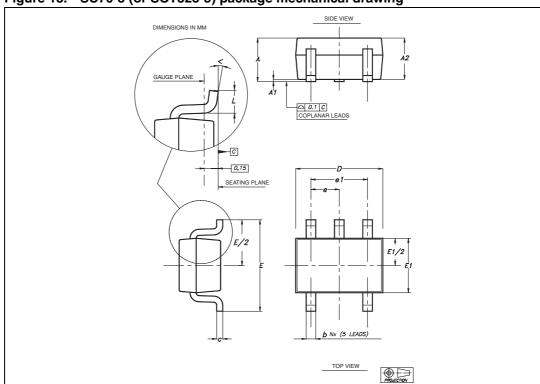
SC70-5 (or SOT323-5) package mechanical drawing
